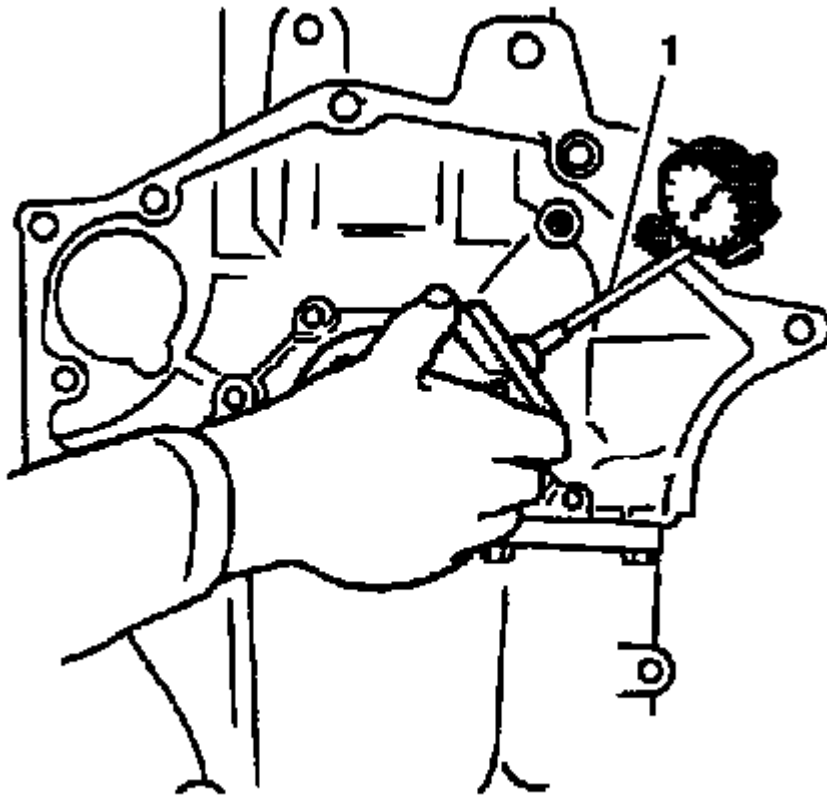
Inspect The Mating Surfaces Of The Transmission Face
